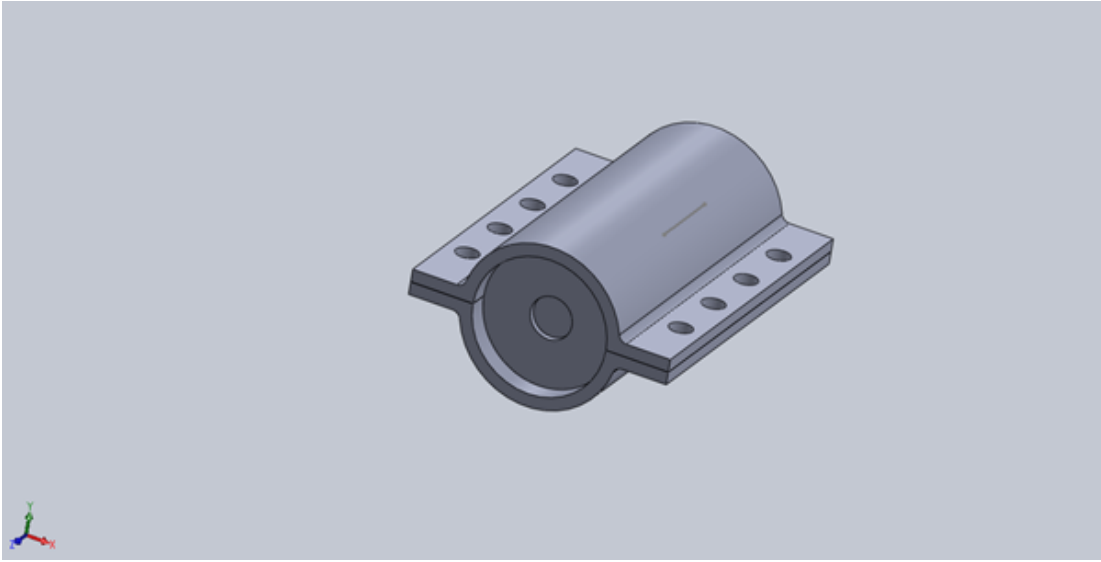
Pipe with grooves and eight holes to fit threaded rods
